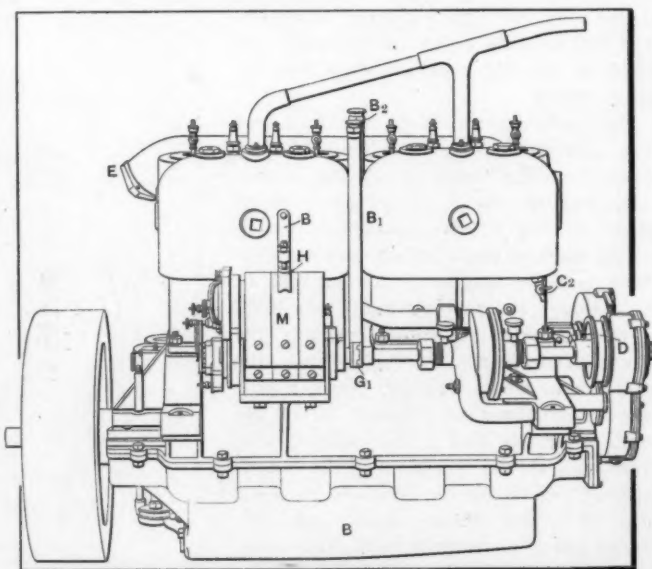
Magneto side of the four-cylinder motor showing the method of drive and attachment
